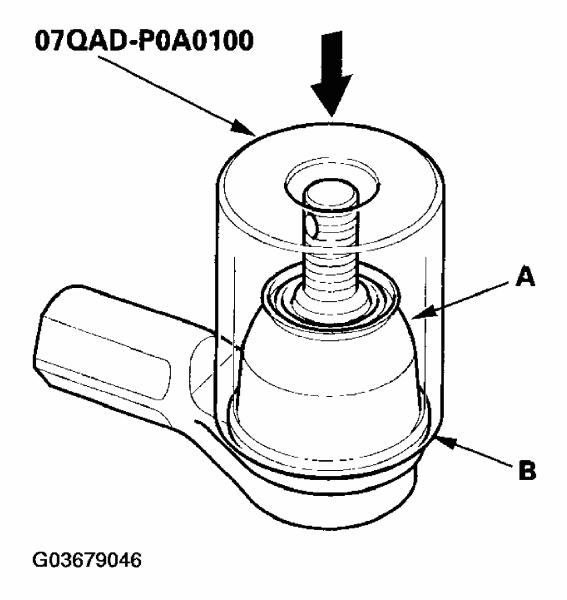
Installing New Boot Using Special Tool Courtesy of AMERICAN HONDA MOTOR CO., INC.
